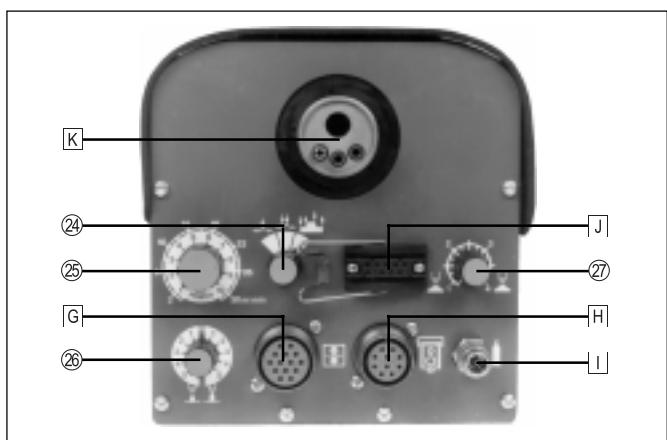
Front view of T.I.M.E. 30 wirefeeder
